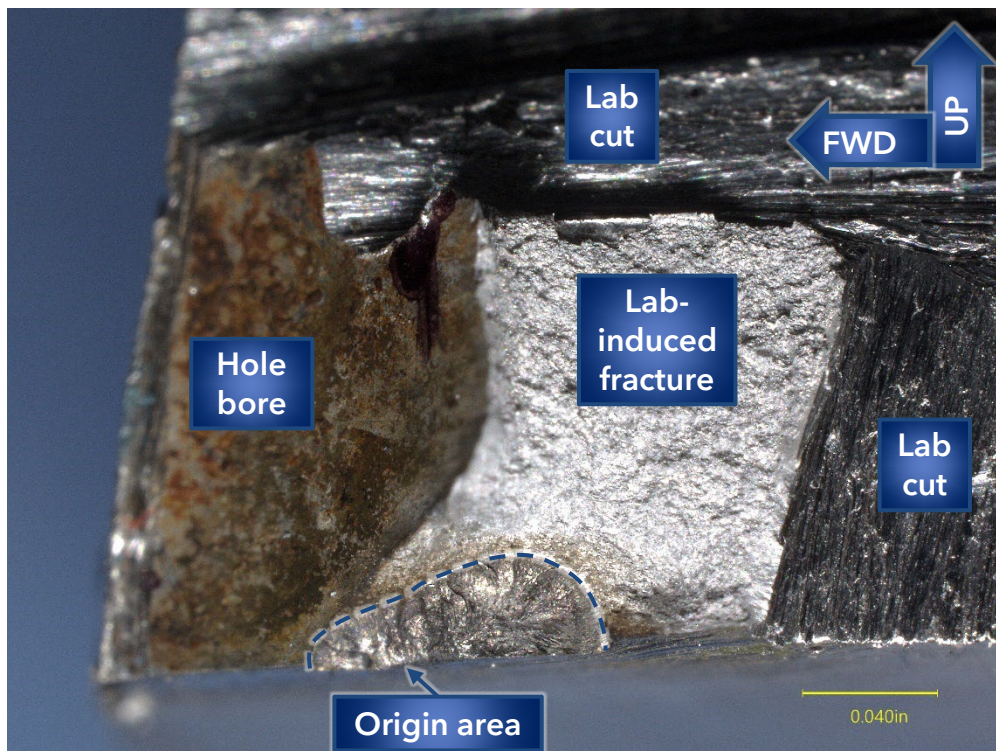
Lab-opened fracture surface after opening the crack intersecting hole RC1 showing fatigue features associated with the crack indicated in the previous figure. A dashed line indicates the fatigue boundary.
